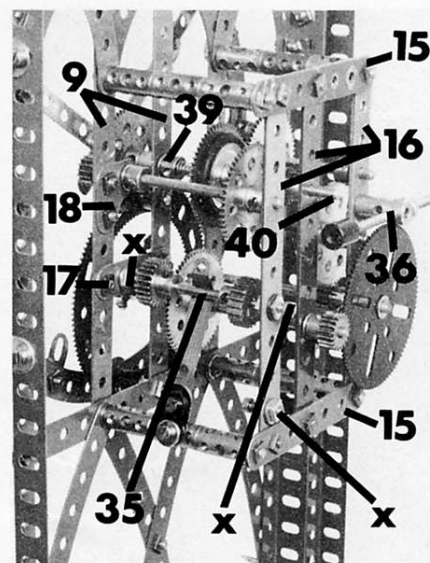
The gearbox seen from a different rear viewpoint, showing positions of Axle Rods.
